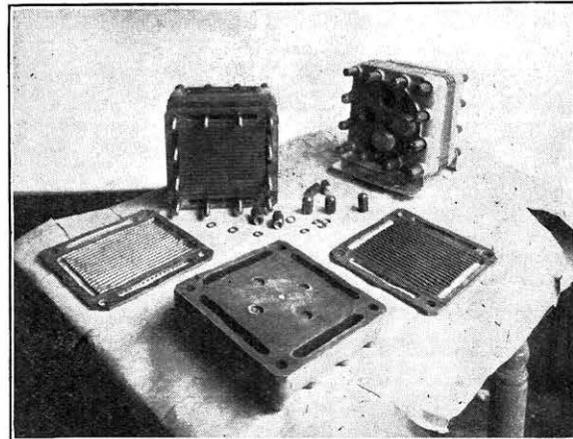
THE HEAT-EXCHANGER COMPONENTS AND ASSEMBLY.
